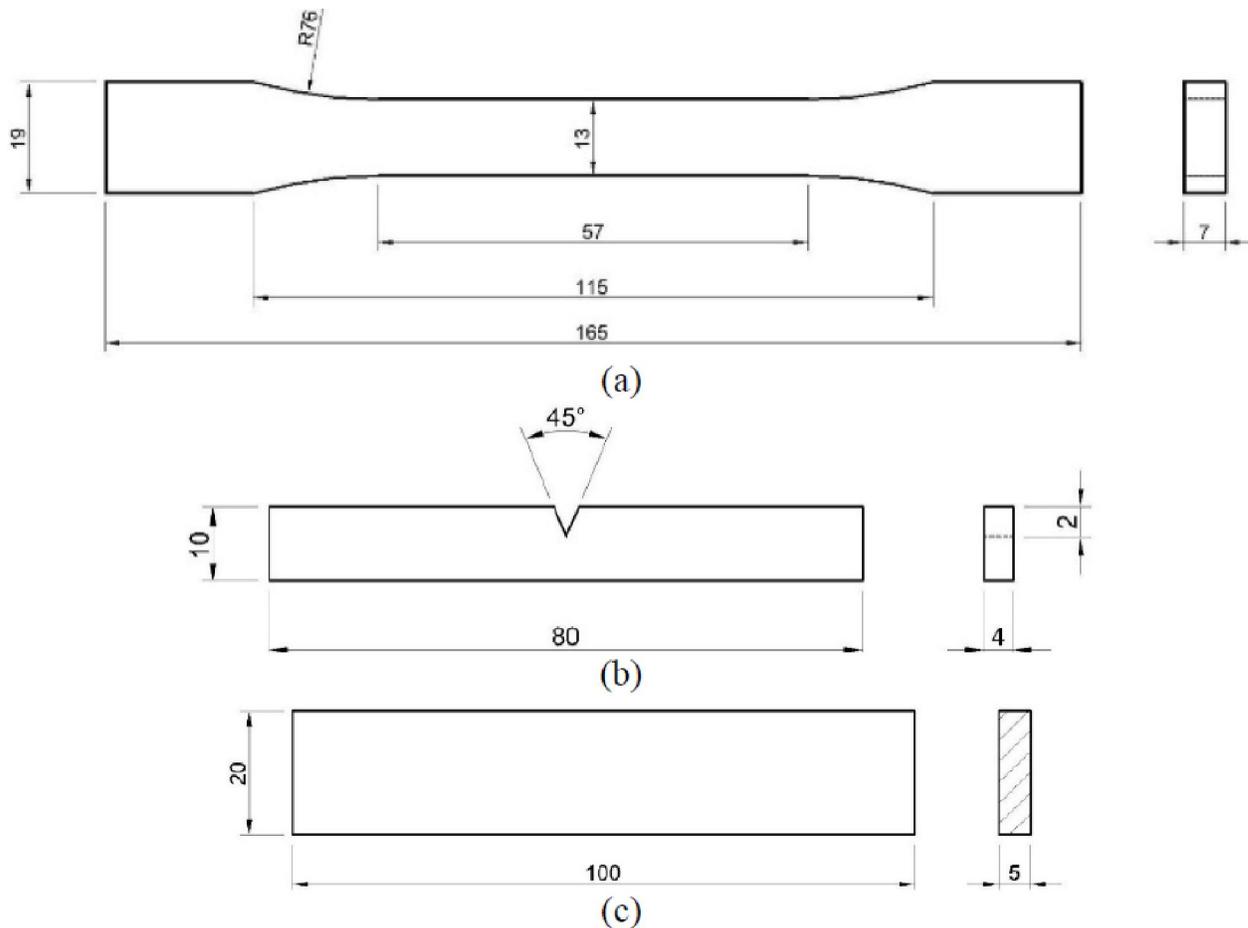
Schematic illustration of (a) tensile specimen, (b) impact specimen and (c) bending specimen (dimensions in mm)
